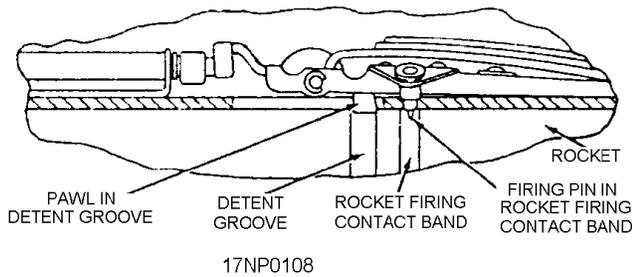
LAU-10 (series) detent pin and firing pin assembly.
